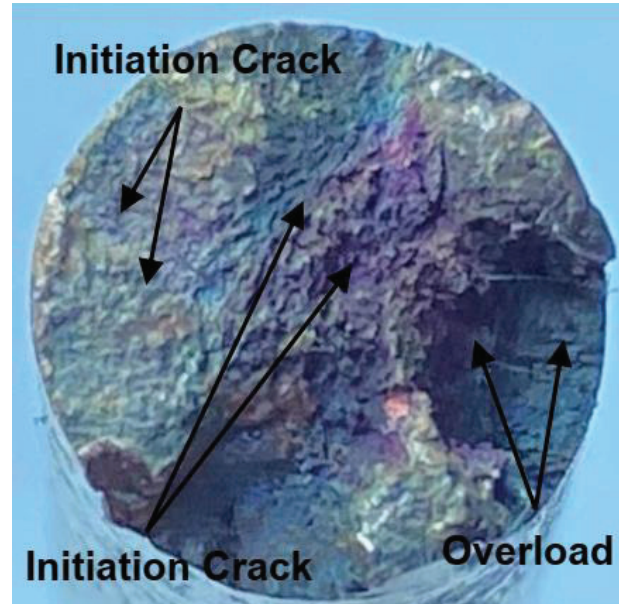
The fracture surface of AISI 1050 Steel
